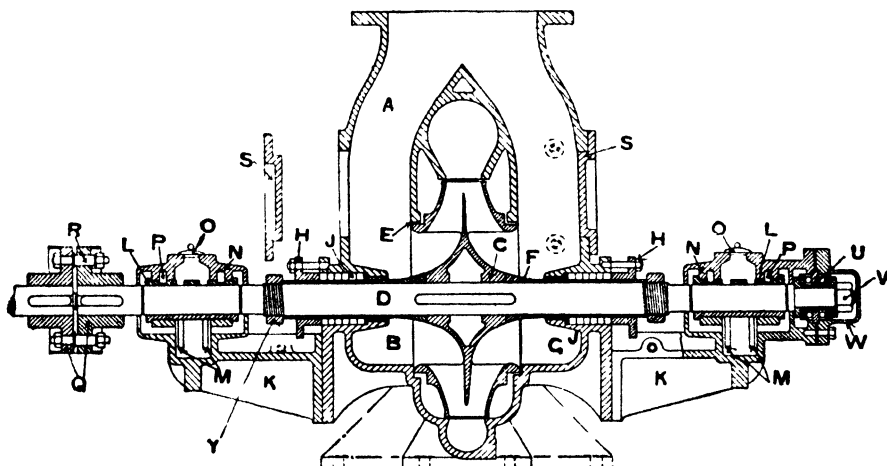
Single Stage Centrifugal Pump (Sectional Elevation).
